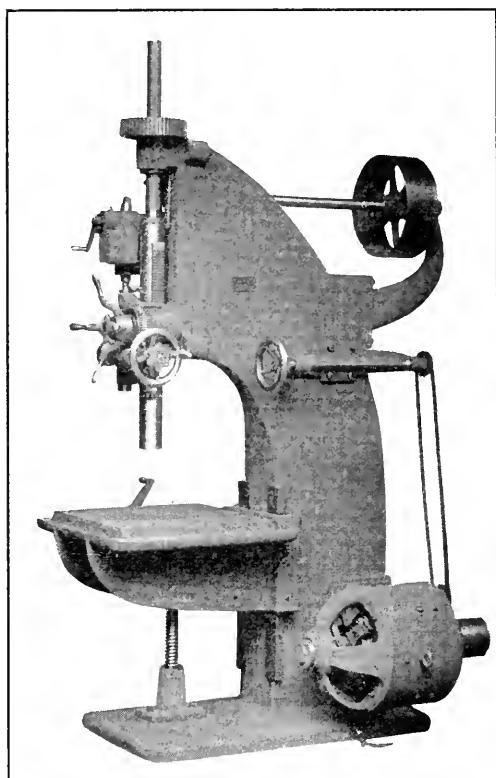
DRILL PRESS DRIVEN BY AN ARMATURE-SHIFTING MOTOR
